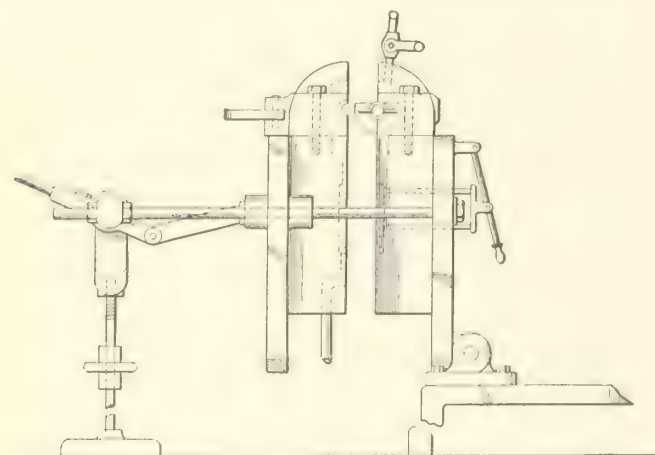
DOEBLINGER COMPRESSED-AIR MACHINE.
